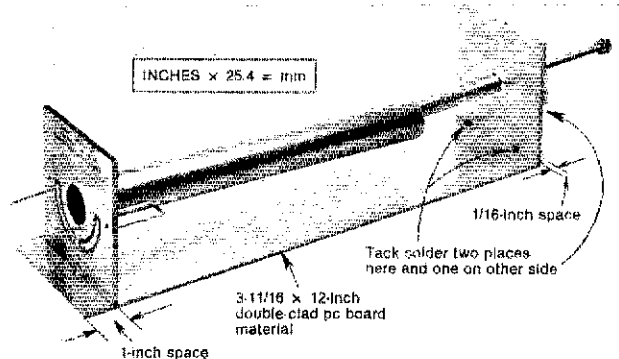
The beginning stages of cavity-case assembly. The two ends are tack-soldered to the side section and the two tubes are centered one inside the other before the soldering is completed.
